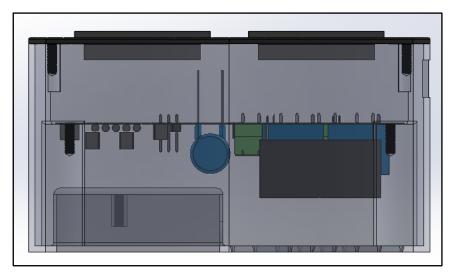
Screw holes for mounting PCB and top Lid with bottom case
